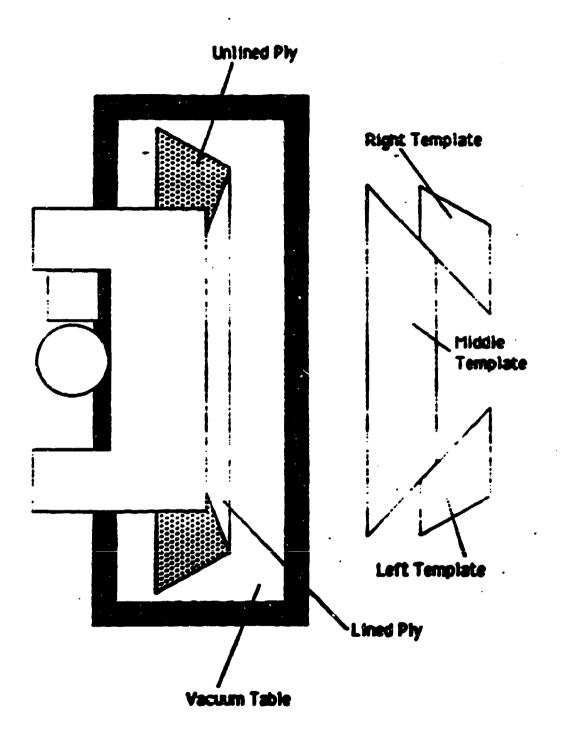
Top View of End-Effector Adjusting Workpiece Position on Tacuum Table
